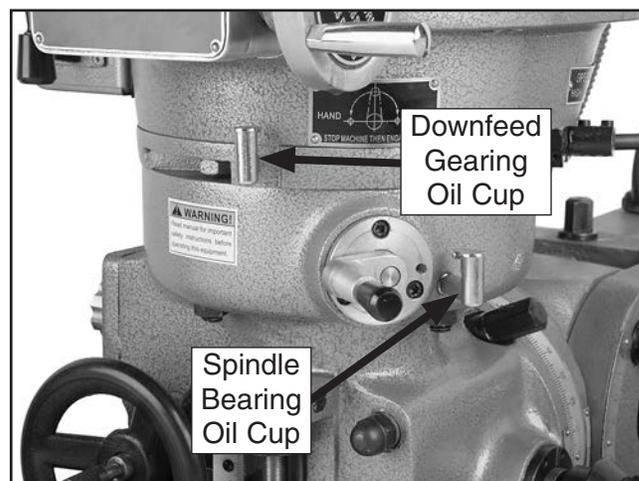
Model G9903 downfeed gearing and spindle bearing oil cups.
